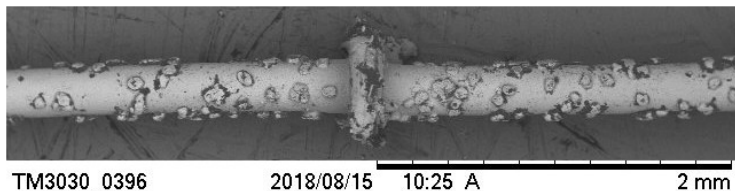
Diamond wire welded with PT6 welding parameters.
